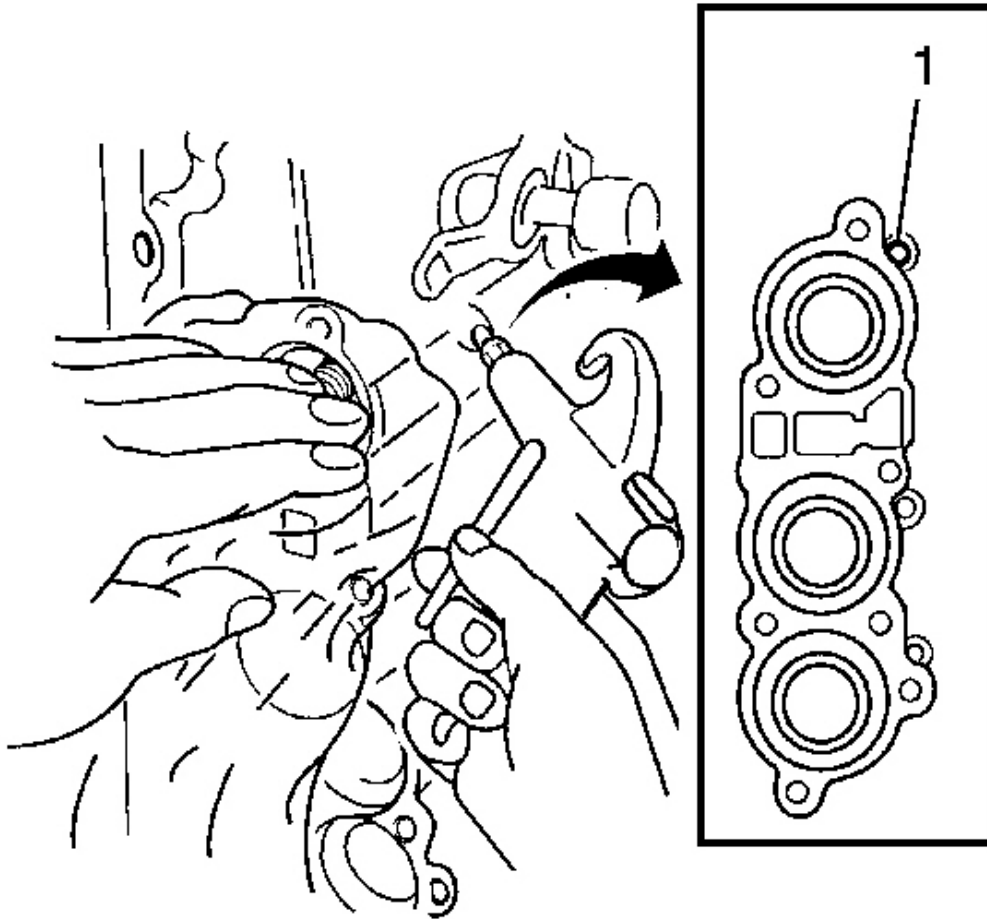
Applying Compressed Air To Oil Hole & Removing O/D & 2nd Brake Clutch Accumulator Piston & Spring.
